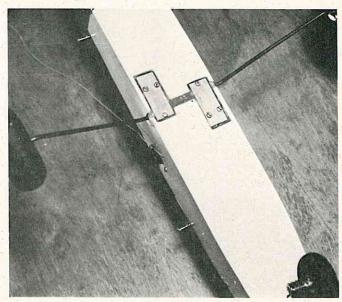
Gear cavity filled with "Twin Weld" forms a solid unit capable of withstanding many hard landings.
